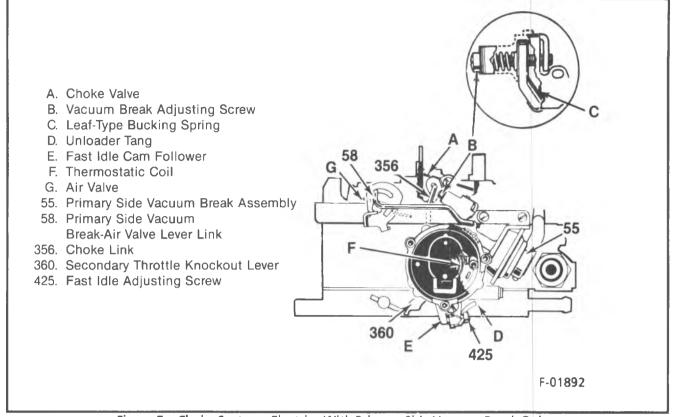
Choke System - Electric - With Primary Side Vacuum Break Only
